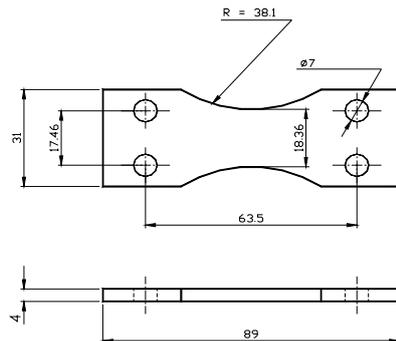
Fatigue test specimen (all dimensions are in millimetres)
